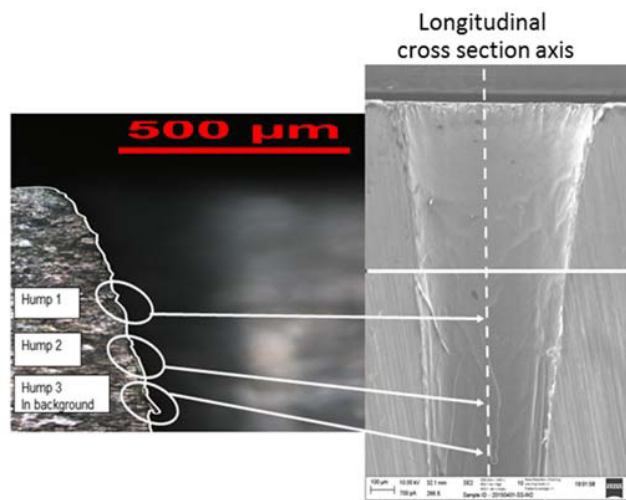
(b) Longitudinal cross section of the cut front – Image expanded in the x direction to show the humps more clearly.
